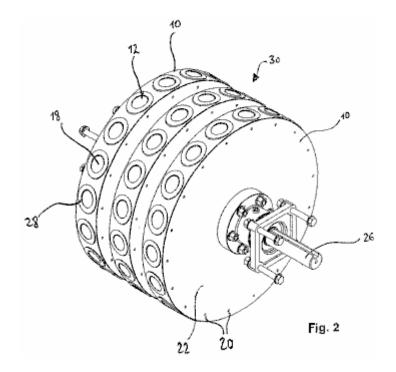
is a perspective view showing a stack of the Fig.1 rotors in an assembled arrangement.
